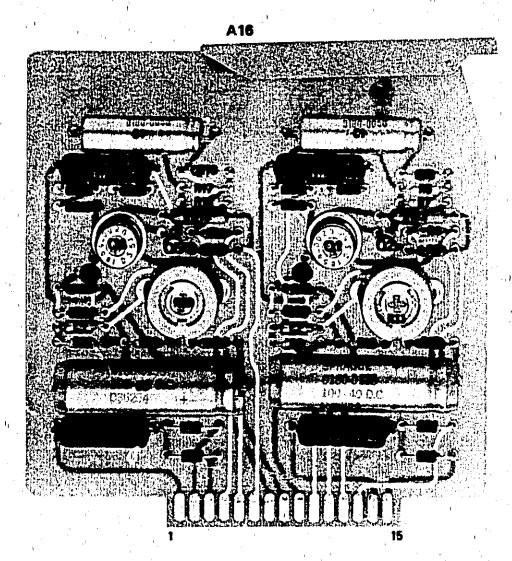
A. A16 Power Supply Assembly Component Identification (ERRATA)
